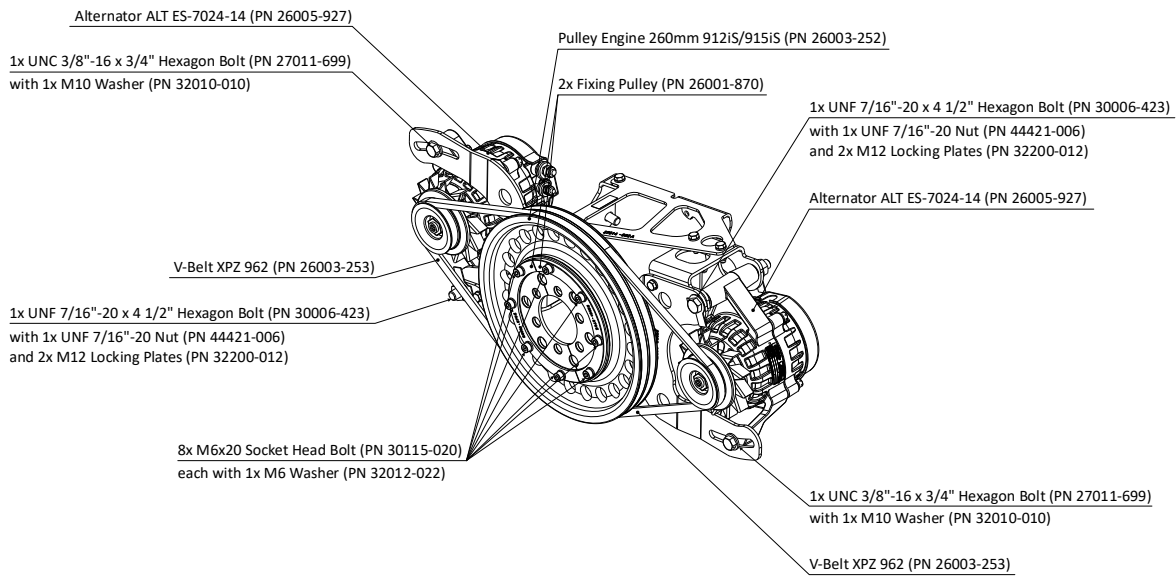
Isometric View Ext. Double Alternator Kit 2x 70A Rotax 915iS
